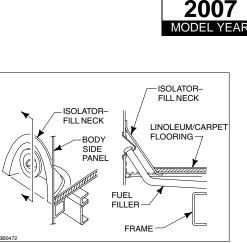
FIGURE A - BODY MOUNTED FUEL FILLER OPENINGS
